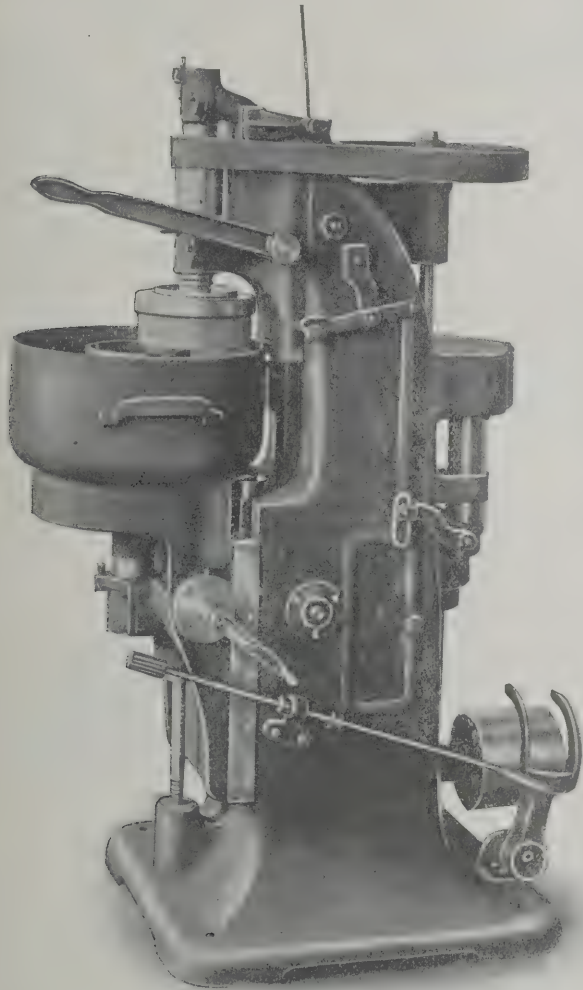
A Rotary Surface Grinder, provided with Magnetic Chuck
